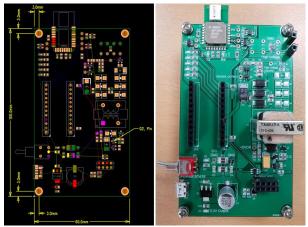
Positioning dose module PCB board (left), component placement PCB board (right)
